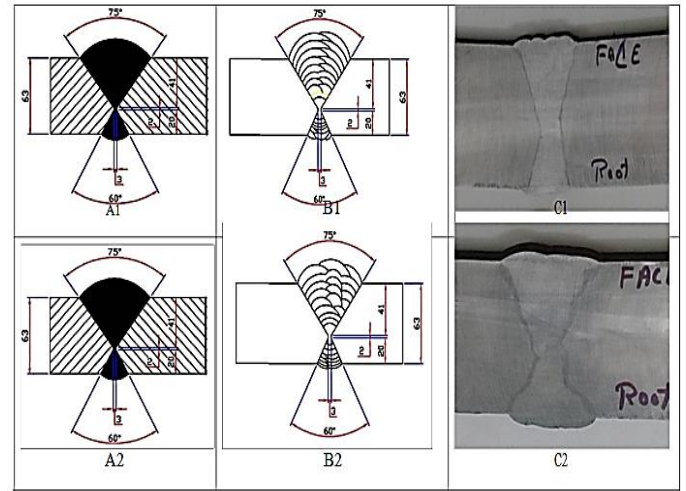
Different groove designs shown schematically (all dimensions in mm).; (A1) Double V butt joint for flux cored arc welding process (B1) Welding sequence for Flux cored arc welding (C1) Cross sectional view of butt welded joint of flux cored arc welding (FCAW) (A2) Double V butt joint for submerged arc welding process (SAW) (B2) Welding sequence for submerged arc welding process (C2) Cross sectional view of butt welded joint of submerged arc welding process (SAW)
